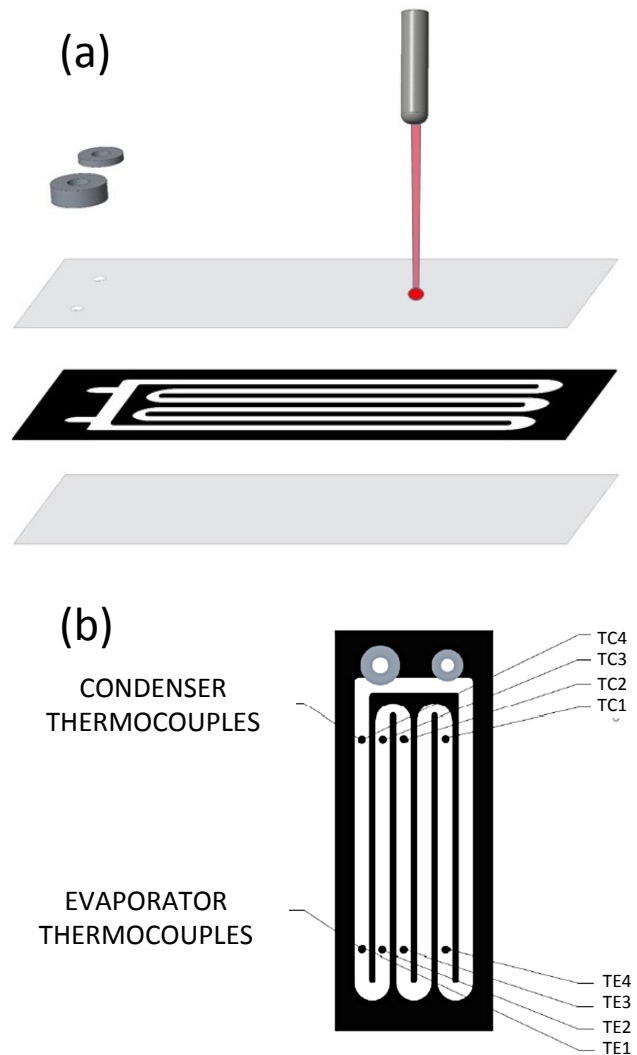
Schematic of the PHS assembly and laser welding process (a) and top view of the assembled PHS showing the serpentine channel and the location of surface thermocouples (b).
